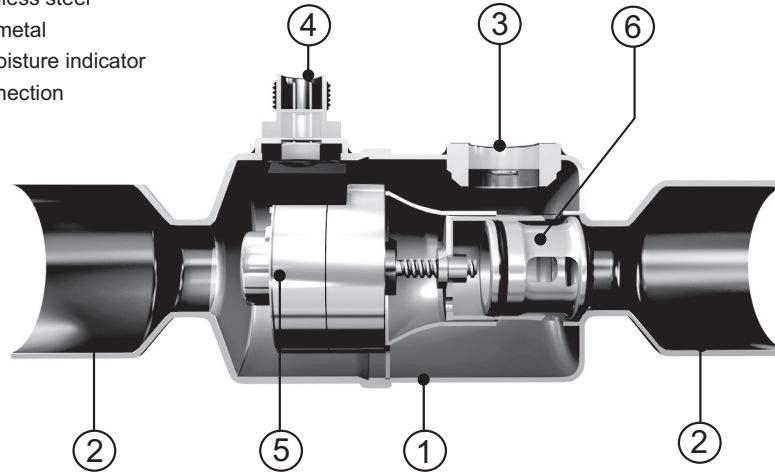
Cutaway View of the Electronic Expansion Valve
